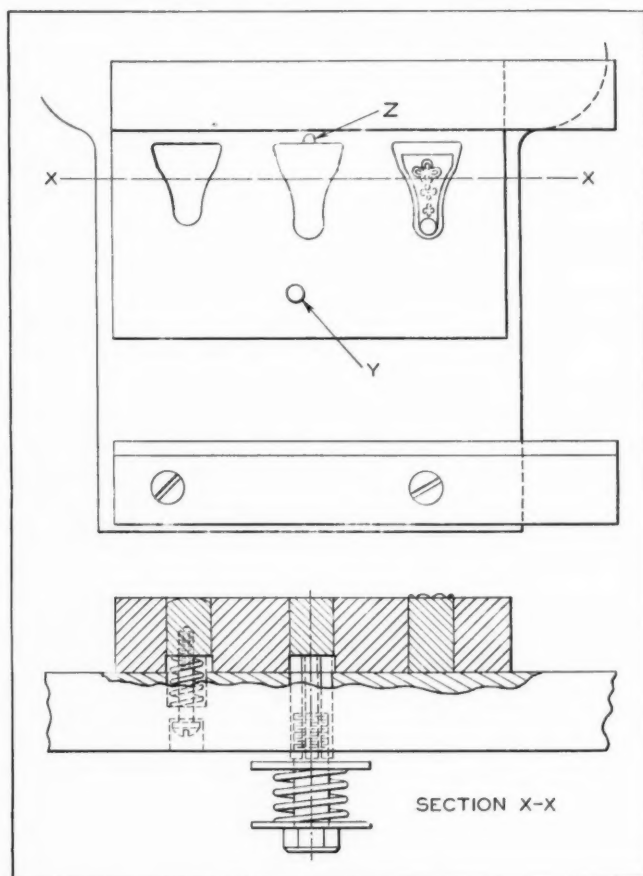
Diagrammatic Lay-out of Die for Embossing and Blanking Part D, Fig. 5, Utilizing Scrap Stock as Shown at E
